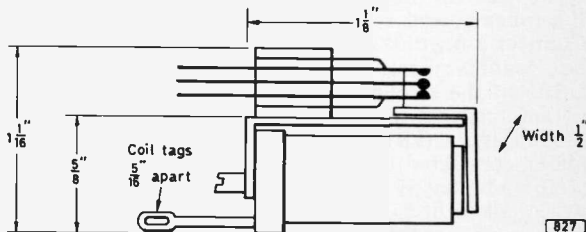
Outline and dimensions of the relay used for channel selection and numicator switching. The relay is a standard PO type.
